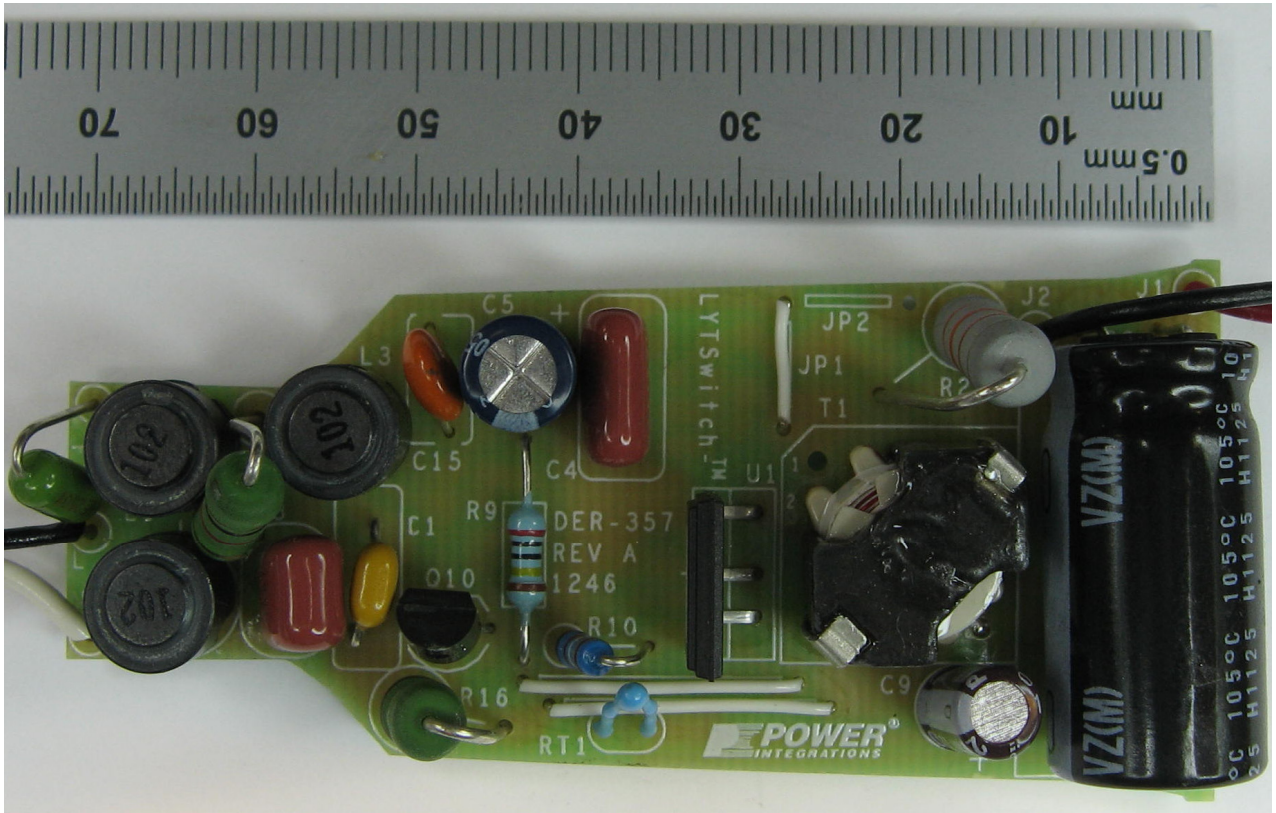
Populated Circuit Board (Top Side) Board Height: 20 mm.
